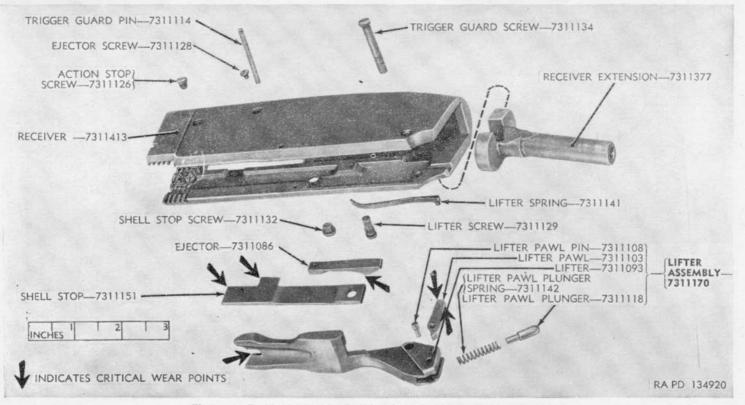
Receiver group for Stevens shotgun M620A-exploded view.
